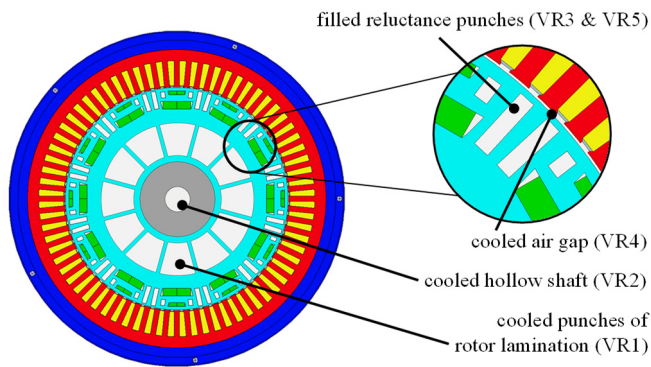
Cross section of geometries for studied rotor cooling concepts.
